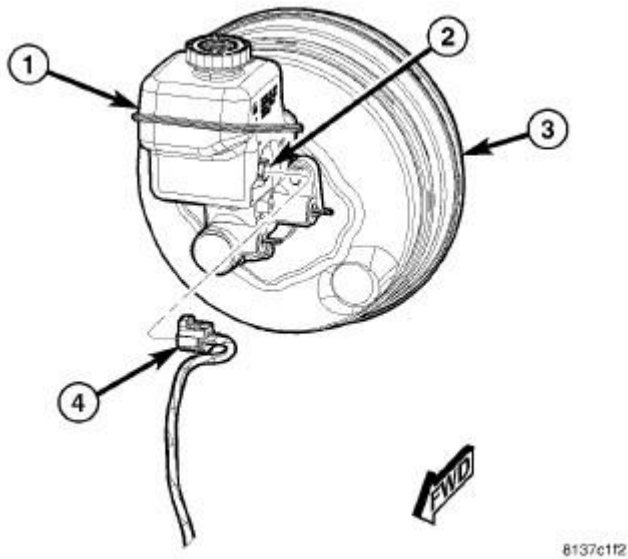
BRAKE FLUID LEVEL SENSOR CONNECTION
